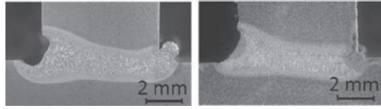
The weld geometry in 1F (left) and 2F (right) welding positions at heat input 360 J/mm, fpp = -2 mm and beam angle of 6°.
